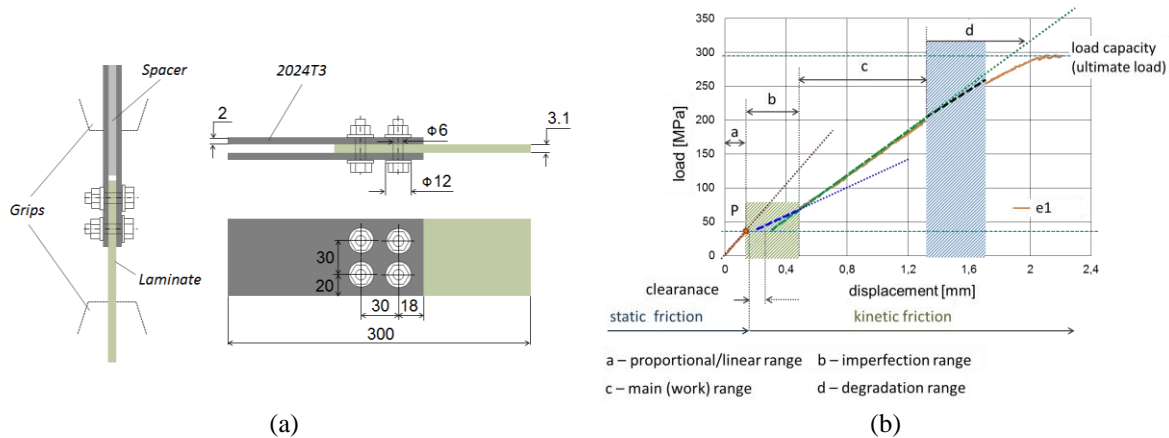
Analyzed double-shear bolted joint: a) test scheme and specimen dimensions; b) selected experimental curve
